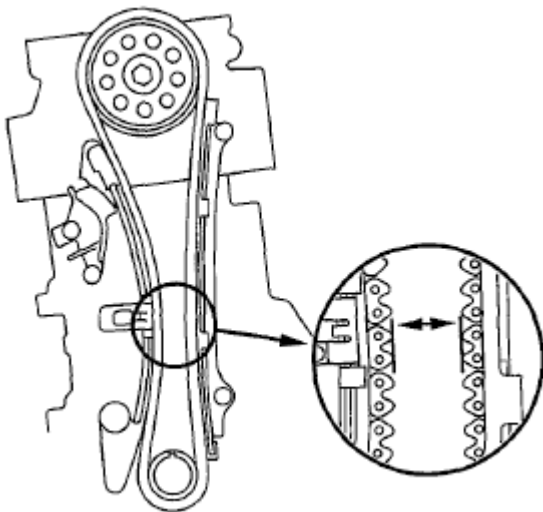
Identifying Distance Between Cam Chain & Tensioner
